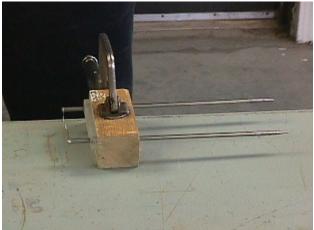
The outer rods after being pressed through the holes in the acrylic piece. They will be pressed through slightly more when the rod length is set.
